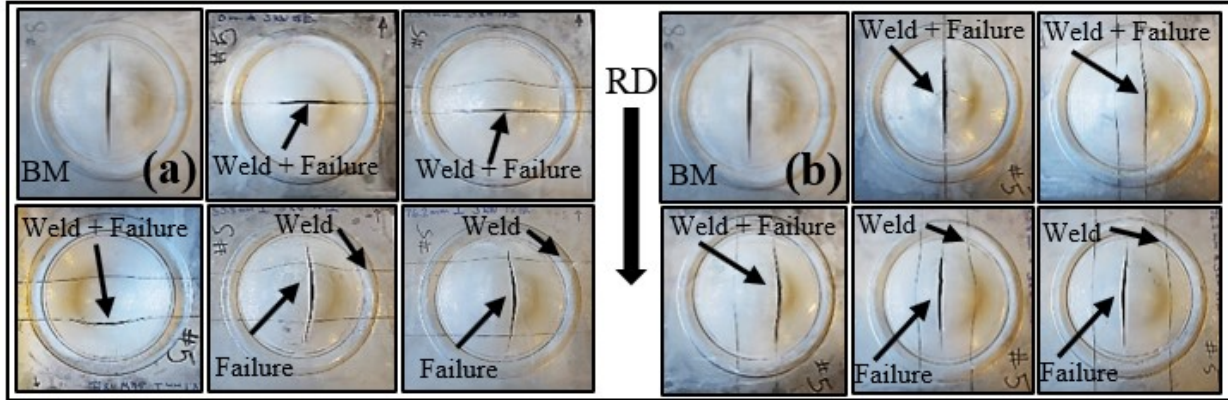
Global formability samples (LDH and Bi-axial stretch test) showing that the failure direction was parallel to the welds: (a) shows the samples with welds in the material's transverse direction and (b) shows the samples with welds in the material's longitudinal direction
